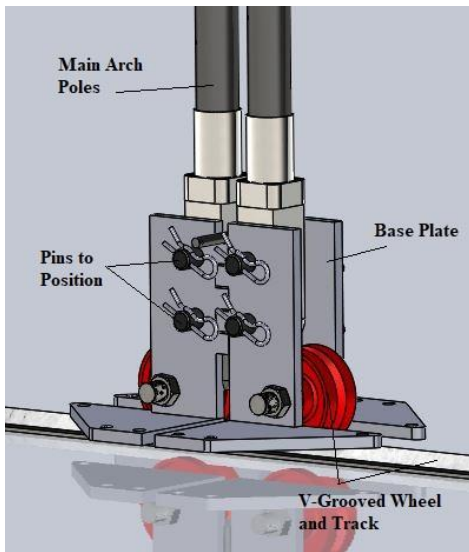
Closed Base Assembly for Launch Vehicle Enclosure
